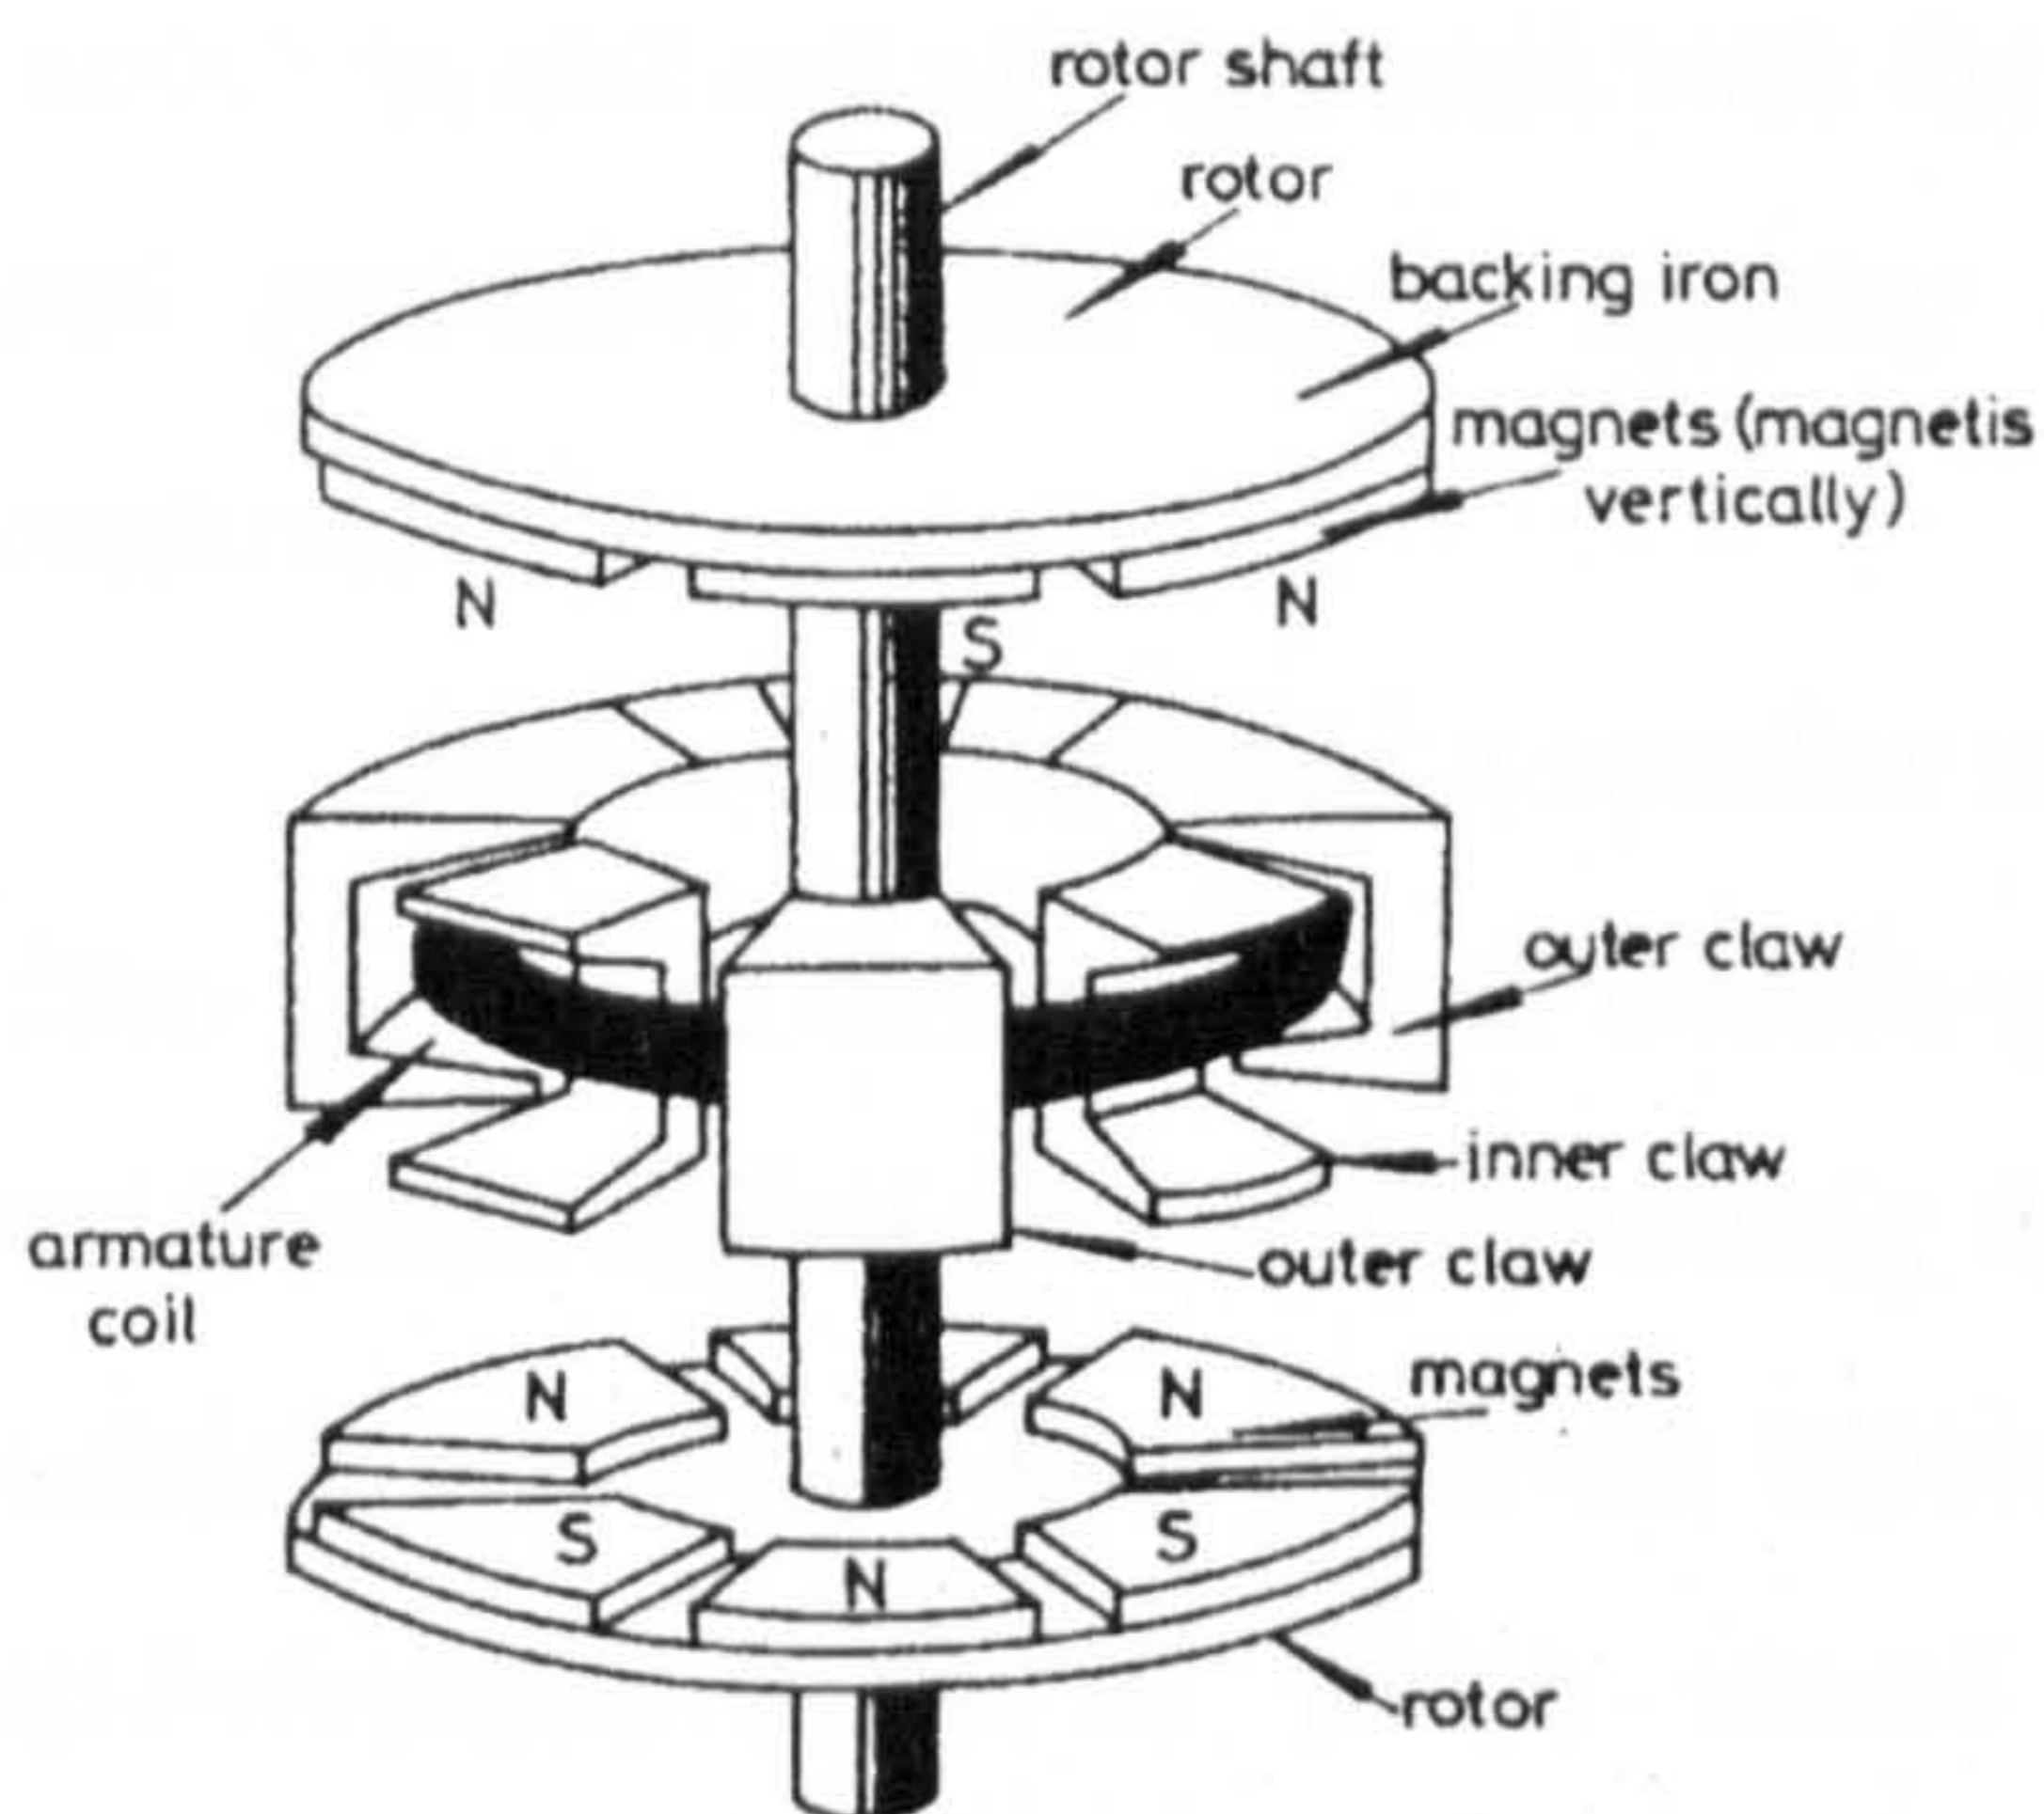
Double-rotor claw motor produced by McLean *et al
